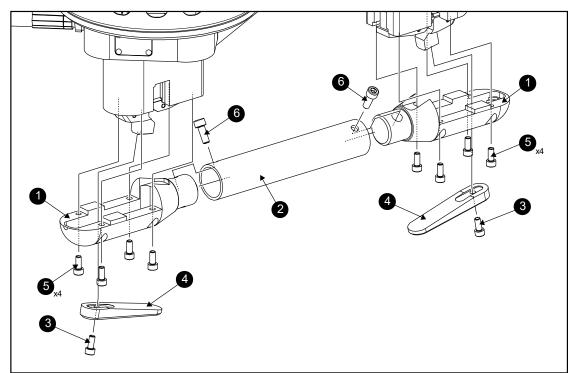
Handle Bar and Liquid Fire Handle Assemblies
